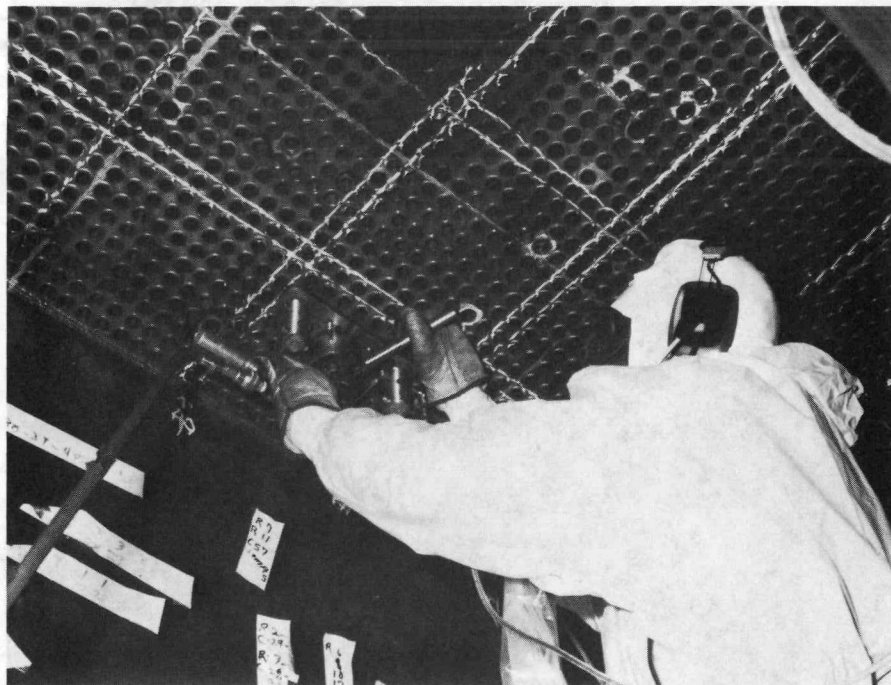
Grinding Off Tube-to-Tube Sheet Weld
